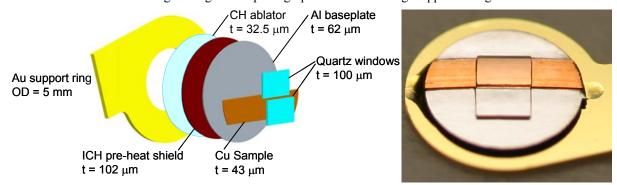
Exploded view of the target design (left) and a photograph of a finished target (right)
